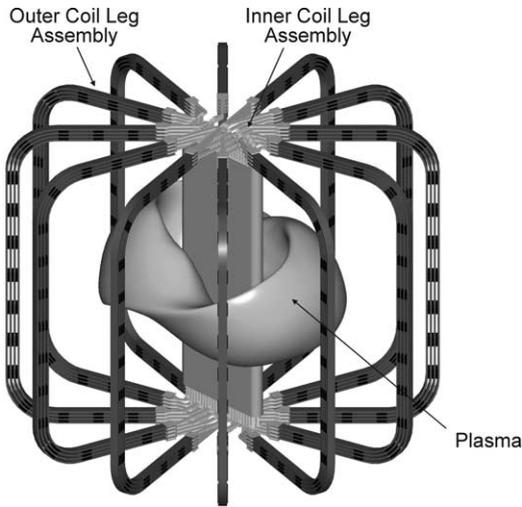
TF geometry showing the oblong inboard leg assembly.
